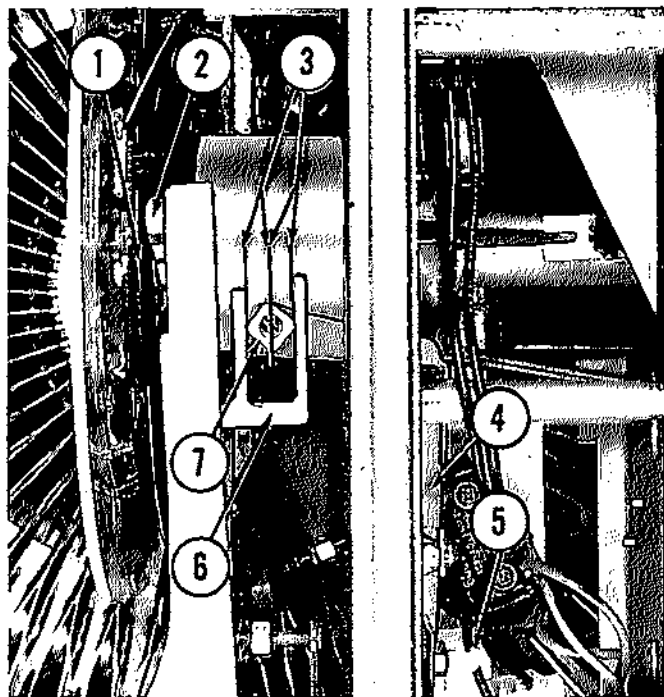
TONE ARM LATCH RELEASE ADJUSTMENT
